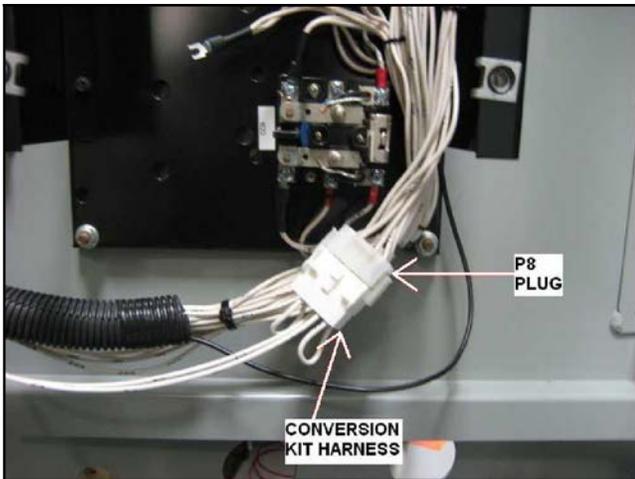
Connect Conversion Kit Wire Harness Connector P8 to Plug P8
